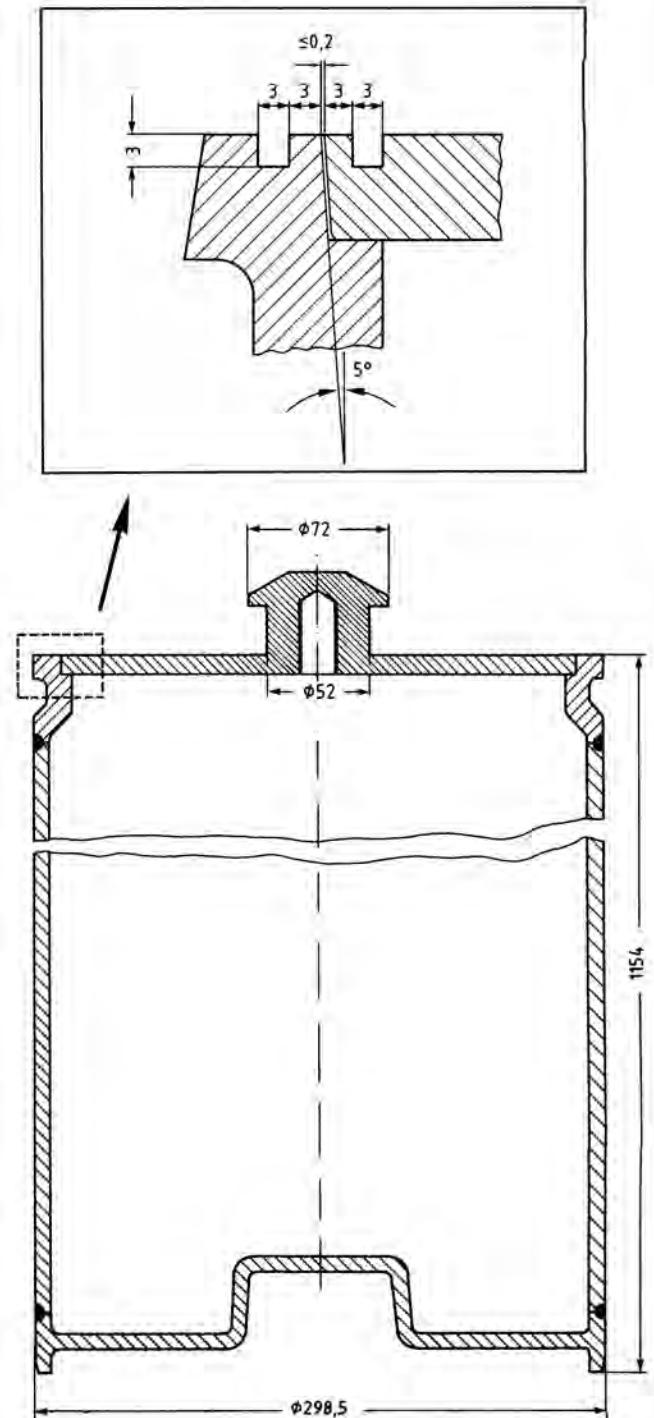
Canister for the Heat and Radiation Sources and Enlarged Weld Area Between Lid and Flange.
